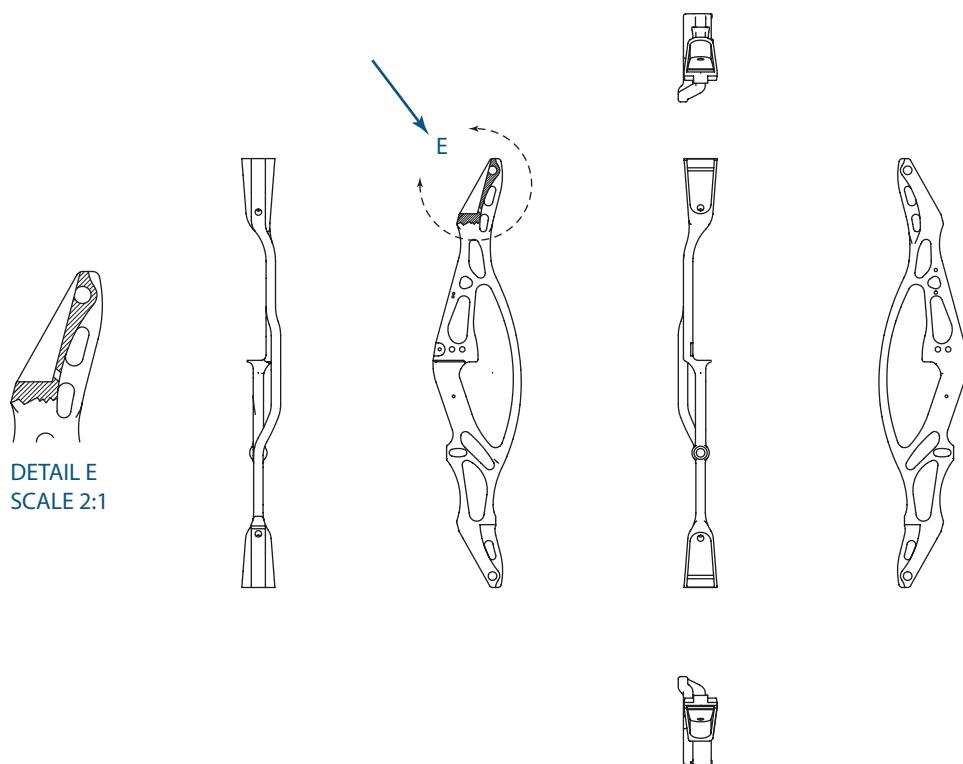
A broken-out section as it would be placed on an engineering drawing.
